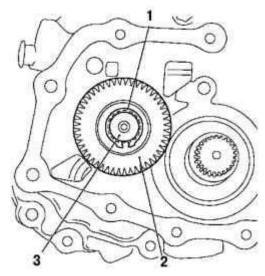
Removing the gear from shaft: 1 - Holder, 2 - fifth gear transmission, 3 - drive shaft
